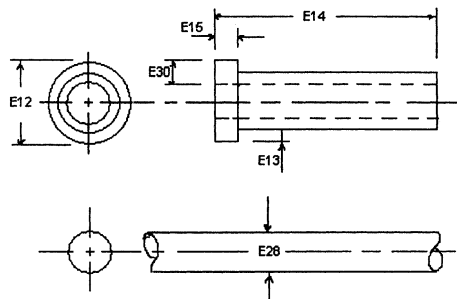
Bush 1 and Shaft 1. Bush 2 and Shaft 2 are similar to these. The dimensions of Bush 2 are E16, E17, E18, E19 and E31. The diameter of Shaft 2 is E29.
